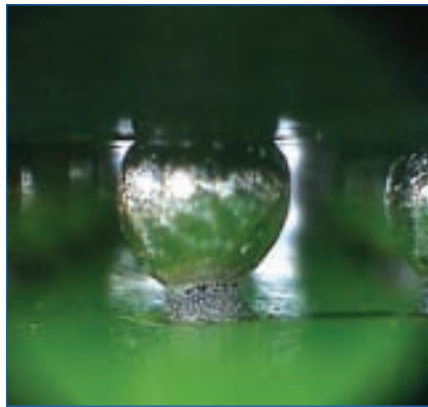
Close-up view of a lead-free BGA and non-reflowed solder paste.
